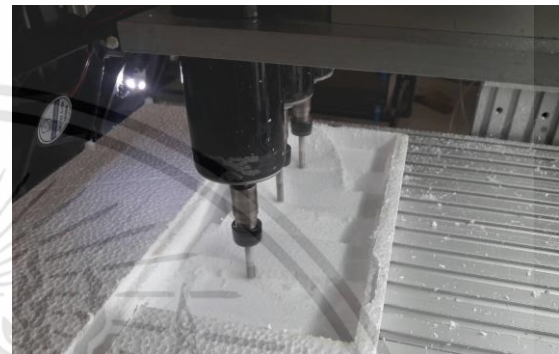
The 3-milling head CNC machine engraved the EPS foam to the customized insole
